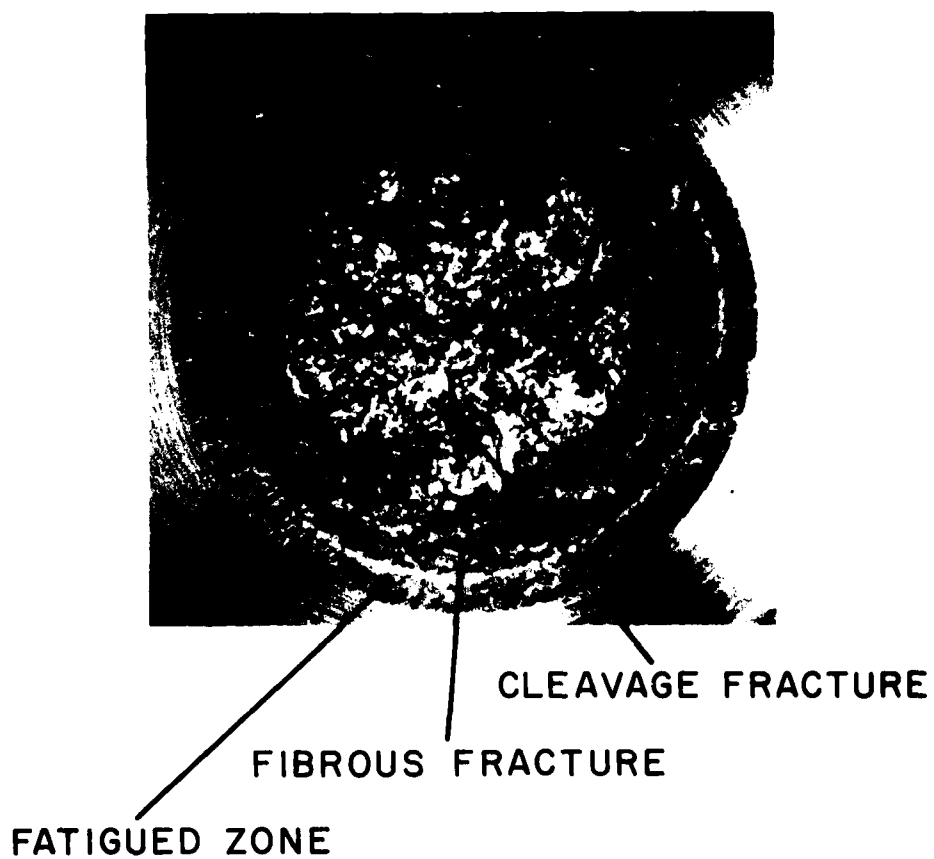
Fracture surface, showing cleavage at the center surrounded by an annulus of fibrous fracture. The fatigued zone is also visible as well as part of the machined surface.
